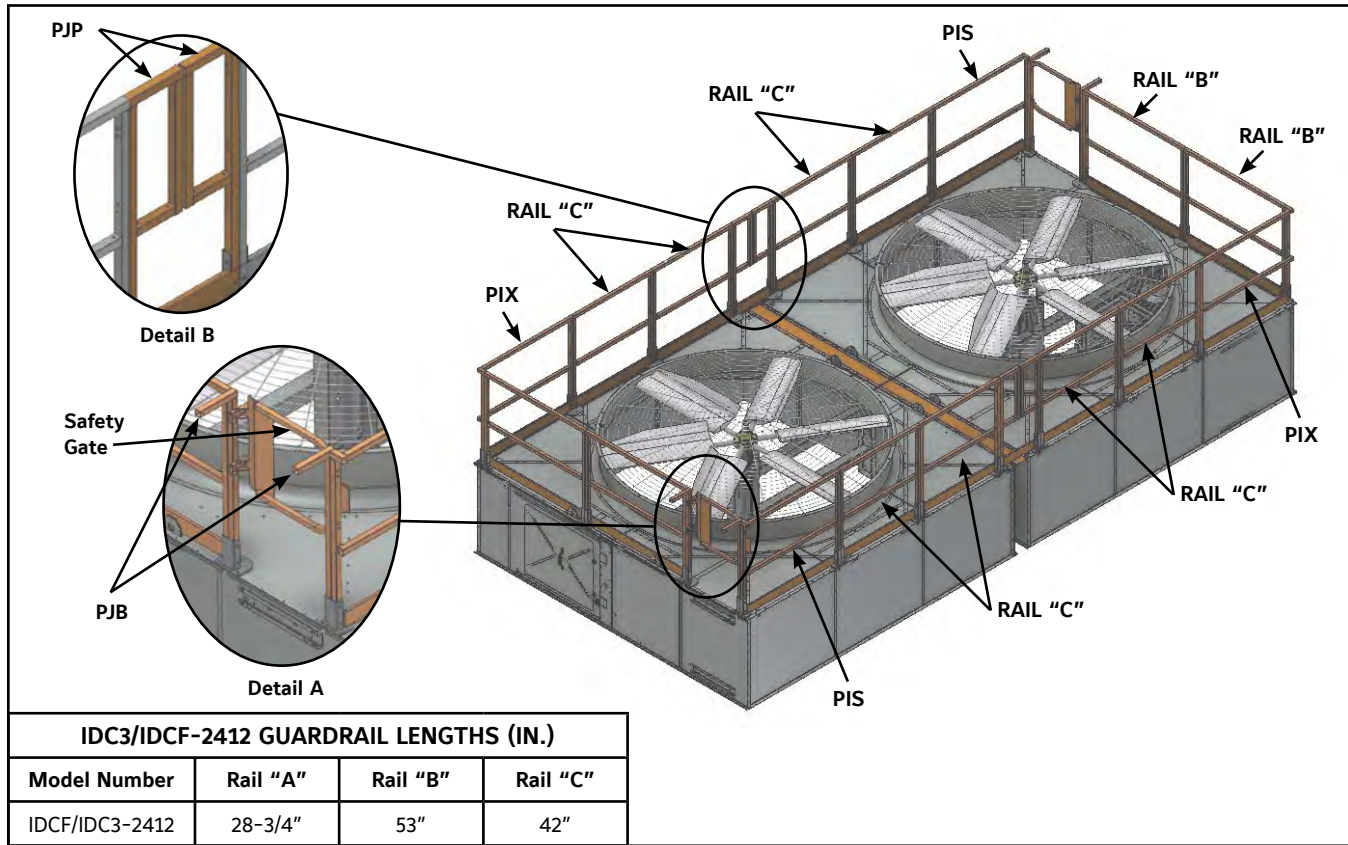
Top Perimeter Guardrails - IDCF/IDCF-2412
